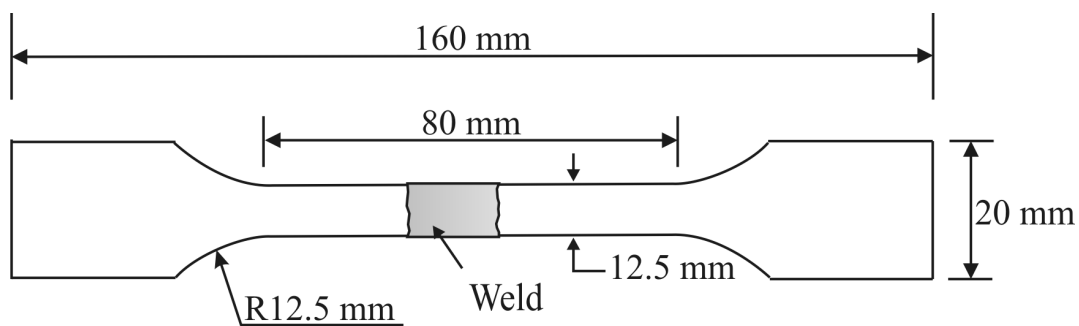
Tensile test specimen as per ASTM E 8M-04 [67].
